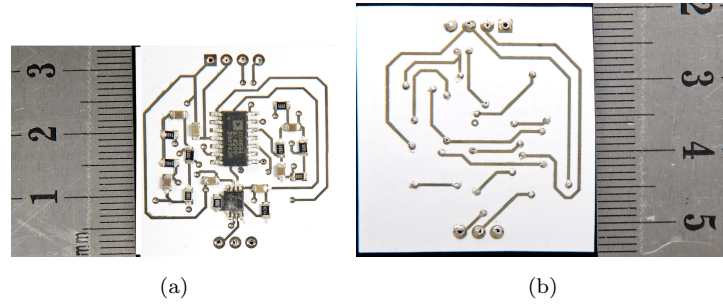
ECG printed circuit. (a) Front layer and (b) bottom layer.
